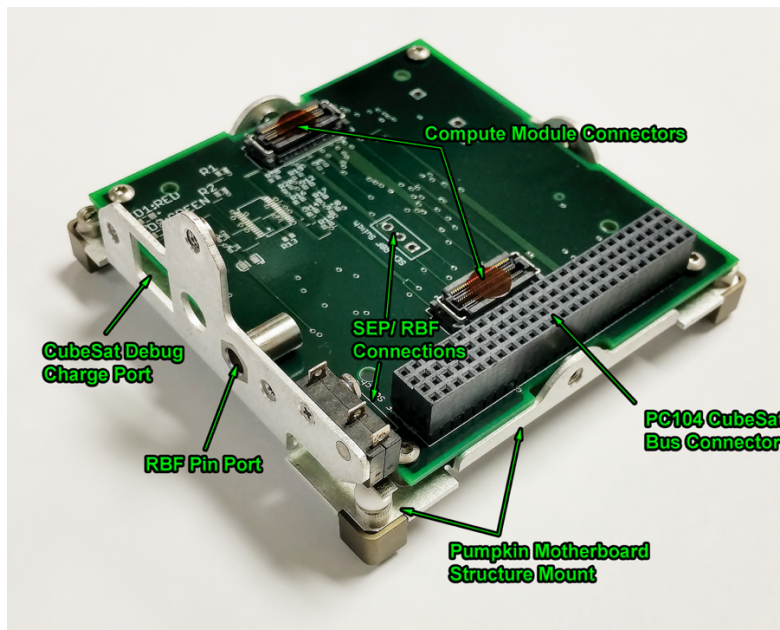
PHOTO OF MOTHERBOARD ASDC PCB PROTOTYPE
